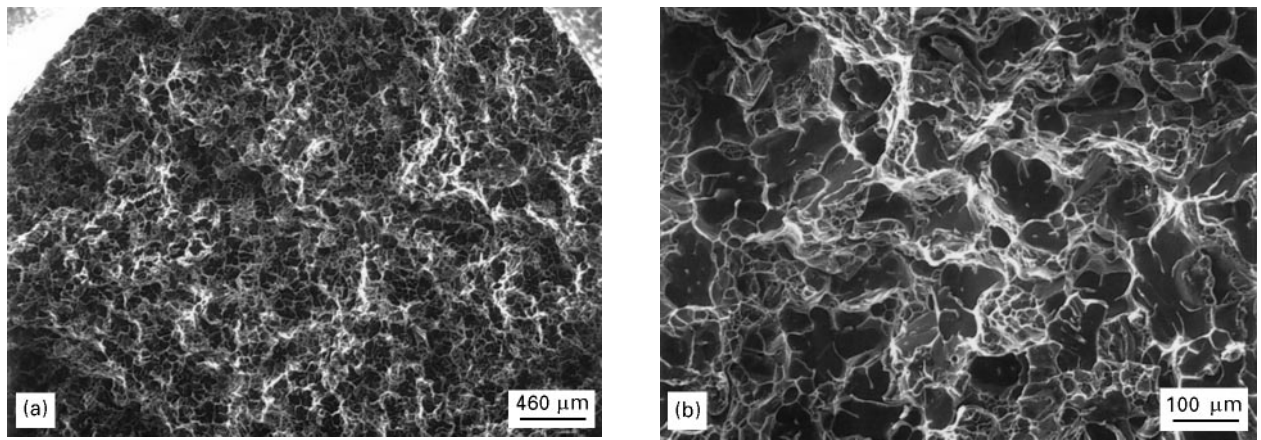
(a, b) SEM images of fatigue fracture surface of the cast material.
